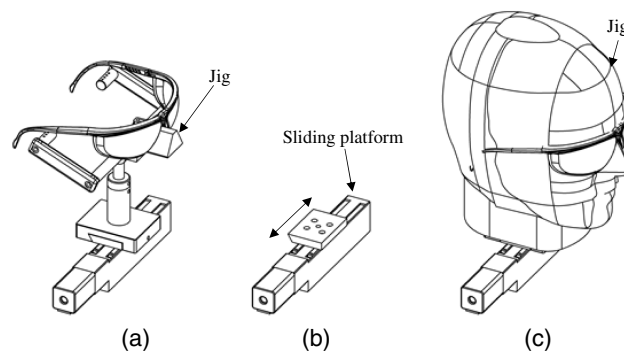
Jig platform (a) Glasses jig, (b) mobile sliding platform, and (c) human head jig.
